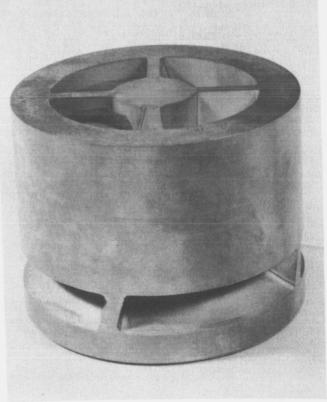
Repressed Third Trial Impeller Sample After Partial Core Removal
